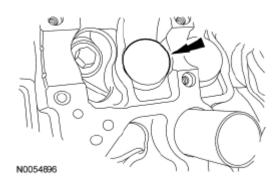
Locating Valve Tappets Courtesy of FORD MOTOR CO.
